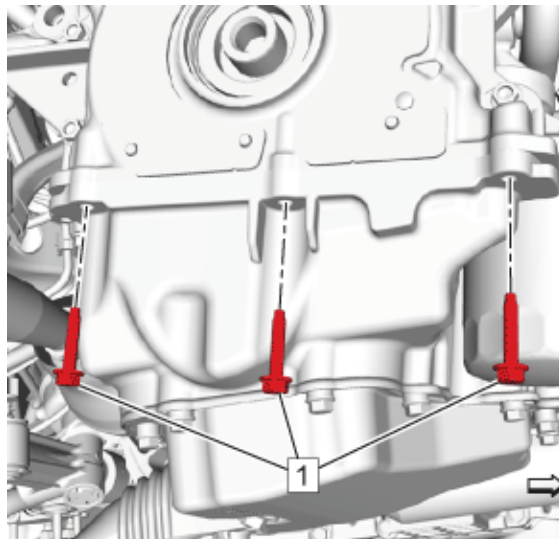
Oil Pan Bolts And Upper Oil Pan
